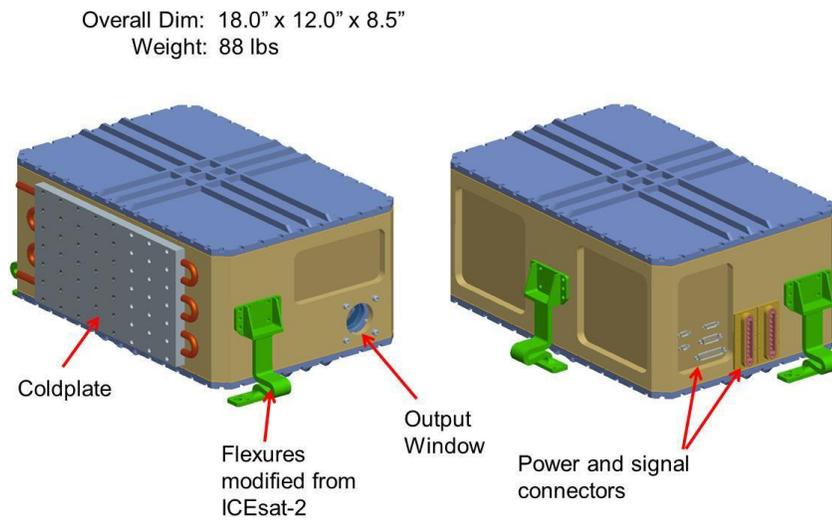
Dimensions, weights and interfaces of the UVLD laser optics module
